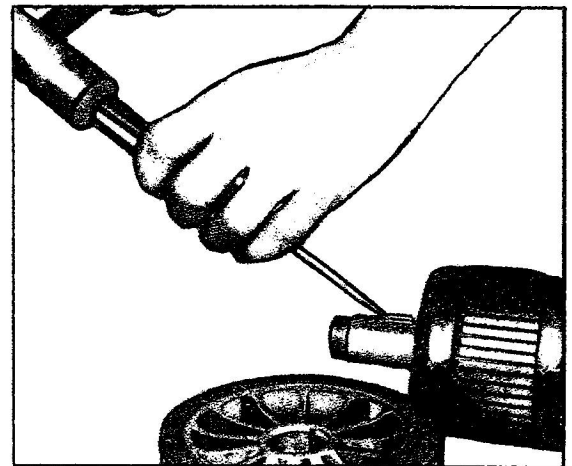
Removal of Cooling Fan and Key From Armature Shaft
